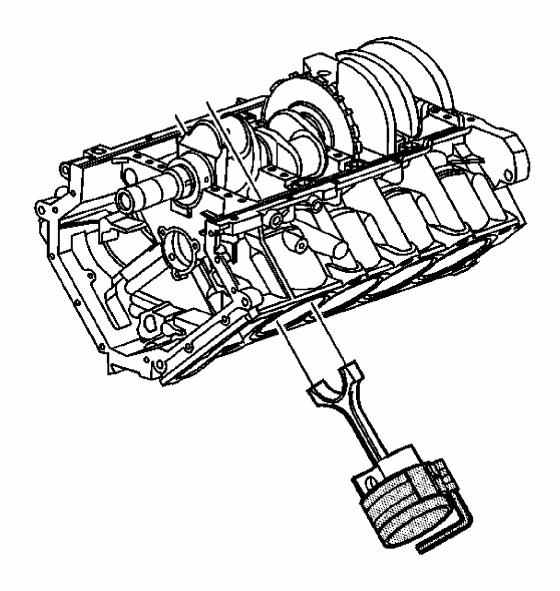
View Of Piston & Connecting Rod Assembly Courtesy of GENERAL MOTORS CORP.
